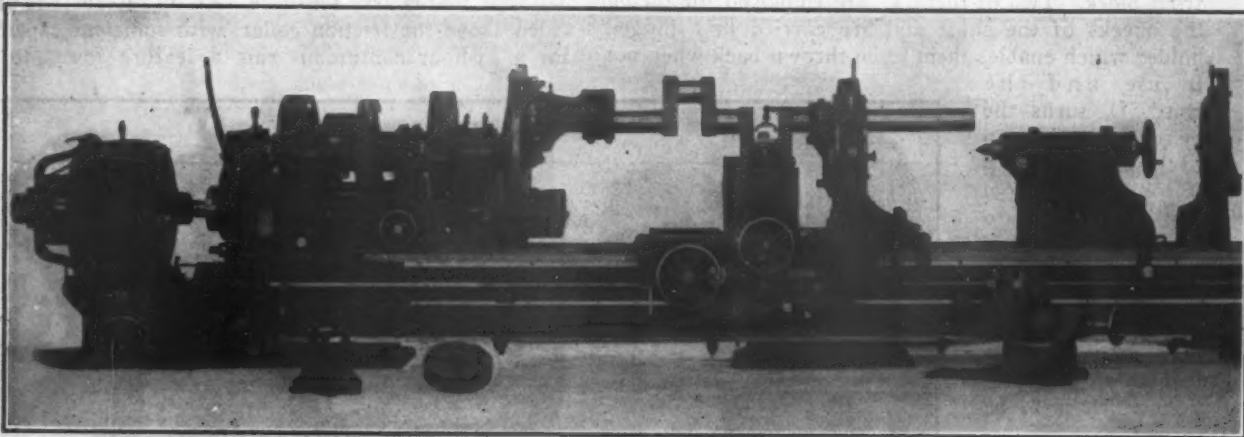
The Crank Shaft Turning Attachment Fitted to a 36-42 In. Lathe, Built by the Lodge & Shipley Machine Tool Company, Cincinnati, Ohio.
